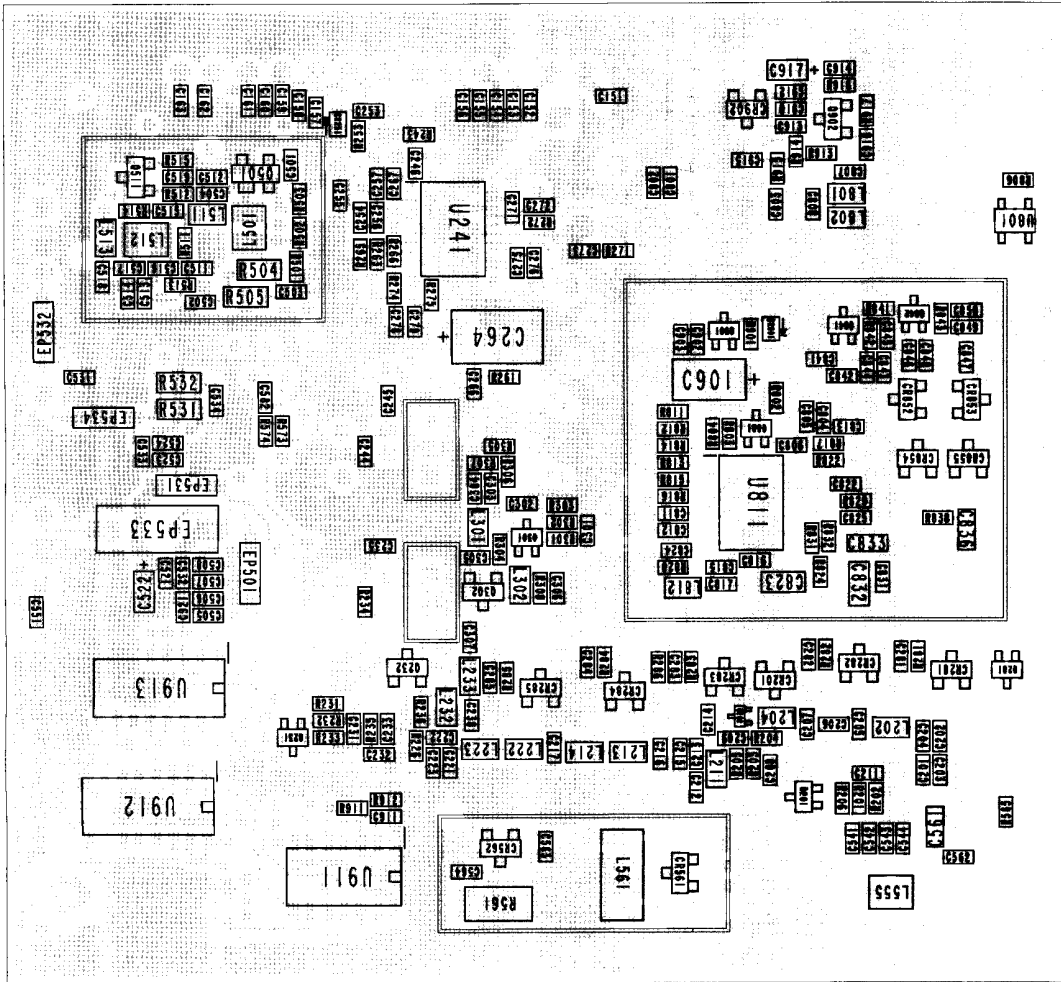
TRANSCIEVER COMPONENT LAYOUT (OPPOSITE COMPONENT SIDE VIEW)
